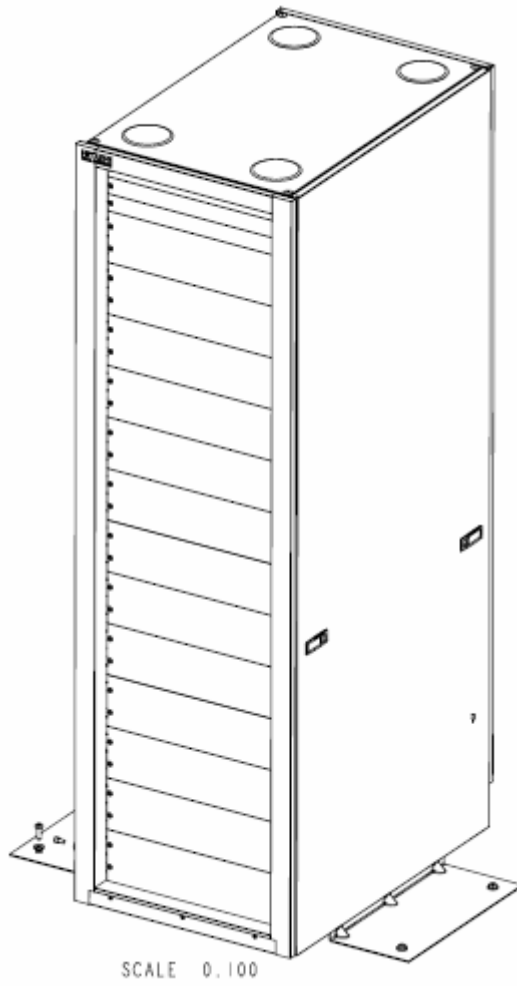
View of Global 19-inch Rack with Side Stabilizer Plates Installed
